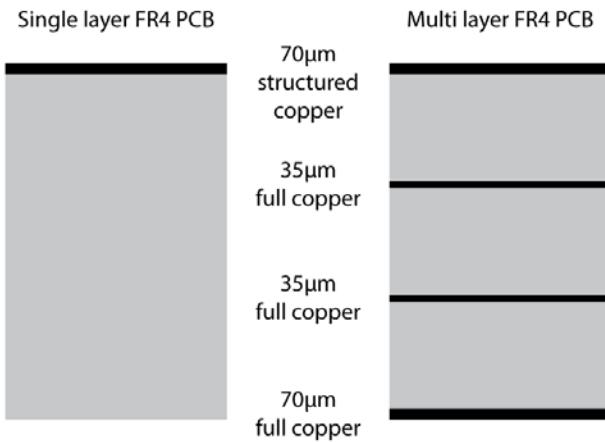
left: Single layer PCB structure, right: Multi layer PCB structure
